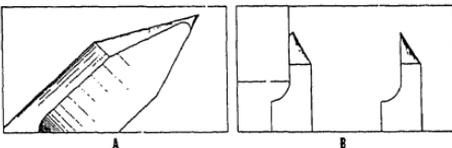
Grinding a conical point: (A) Cutter angle. (B) Rough and finished conical shape.
